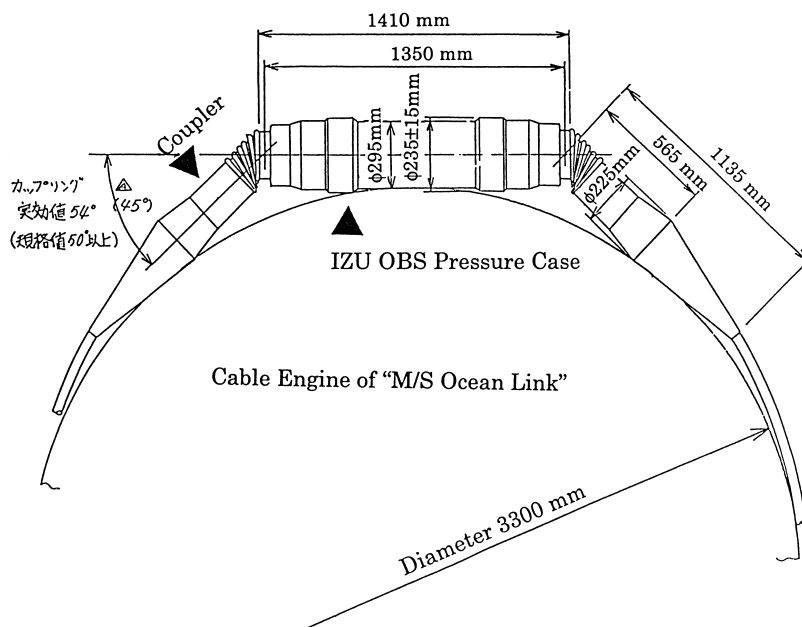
Pressure case of IZU OBS with a coupler at each end on ship cable engine.
